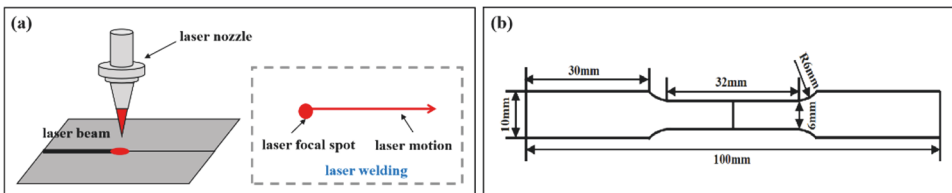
(a) Schematic diagram of laser welding; (b) Schematic diagram of tensile specimen dimensions.
